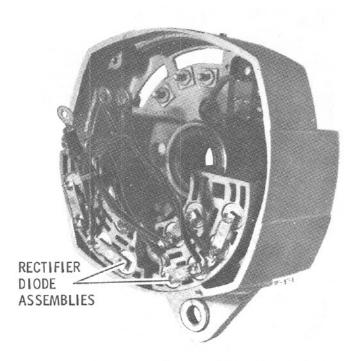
TYPICAL REMOVAL OF RECTIFIER DIODE ASSEMBLY
